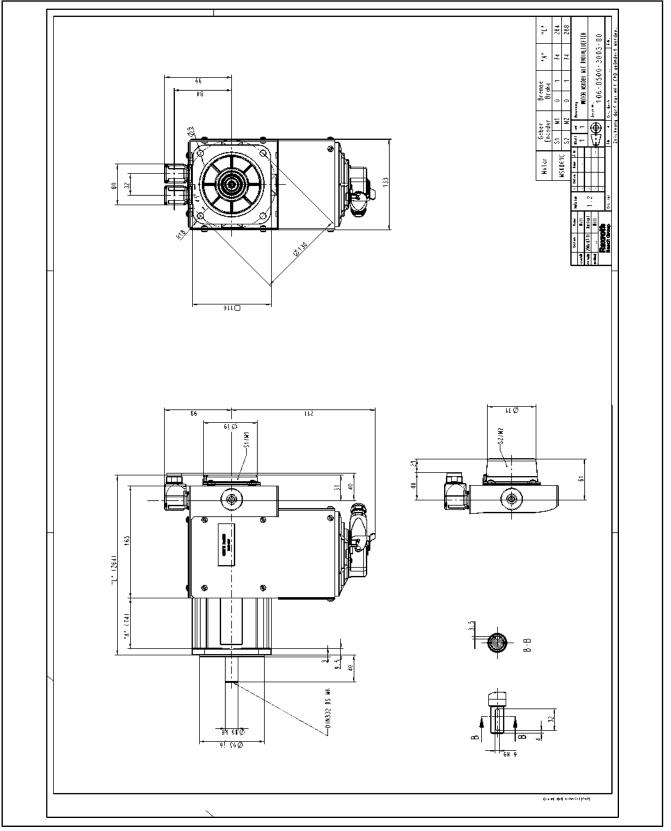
Dimension sheet MSK061 with radial fan unit
